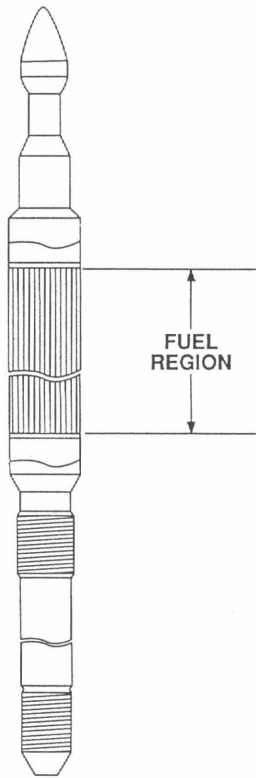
Simplified drawing of a BN600 fuel assembly.
